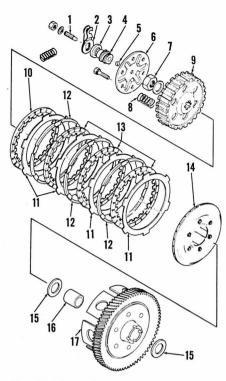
Exploded view of manual clutch assembly. On YJ-1 models, only two friction discs (13), two cushion rings (12) and three clutch plates (11) are used,
